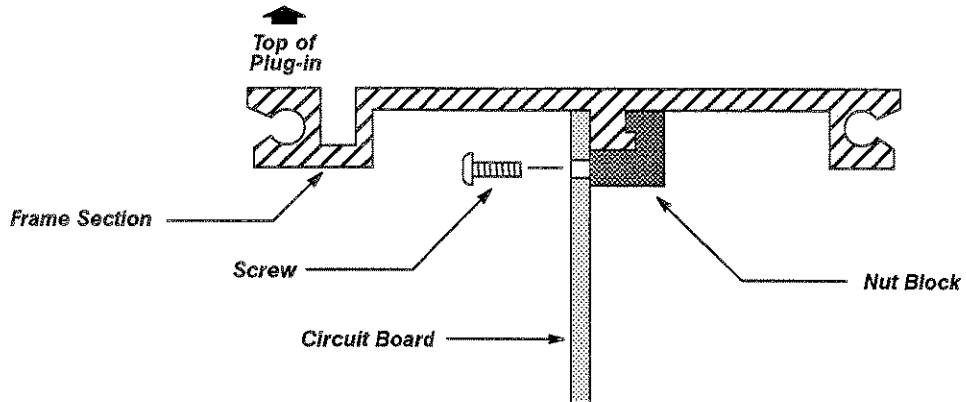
Location of a Nut Block Securing the Circuit Board to the Frame Section
